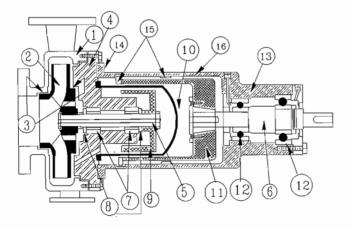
Magnetic Drive Pump. 1) Casing, 2) impeller, 3) wear ring, 4) back cover, 5) internal shaft, 6) external shaft, 7) radial sleeve bearing, 8) thrust bearing, 9) inner magnet rotor, 10) containment shell, 11) external magnet rotor, 12) antifriction bearing, 13) bearing housing, 14) transition flange, 15) safety rub ring, and 16) outer containment shell.
